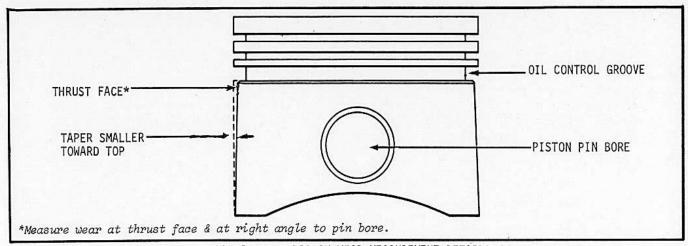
PISTON WEAR MEASUREMENT DETAILS
